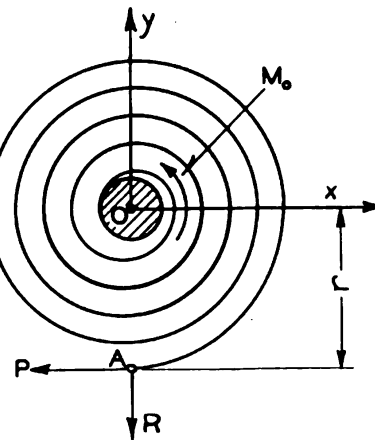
Pinned outer end of a spiral spring, large number of turns
